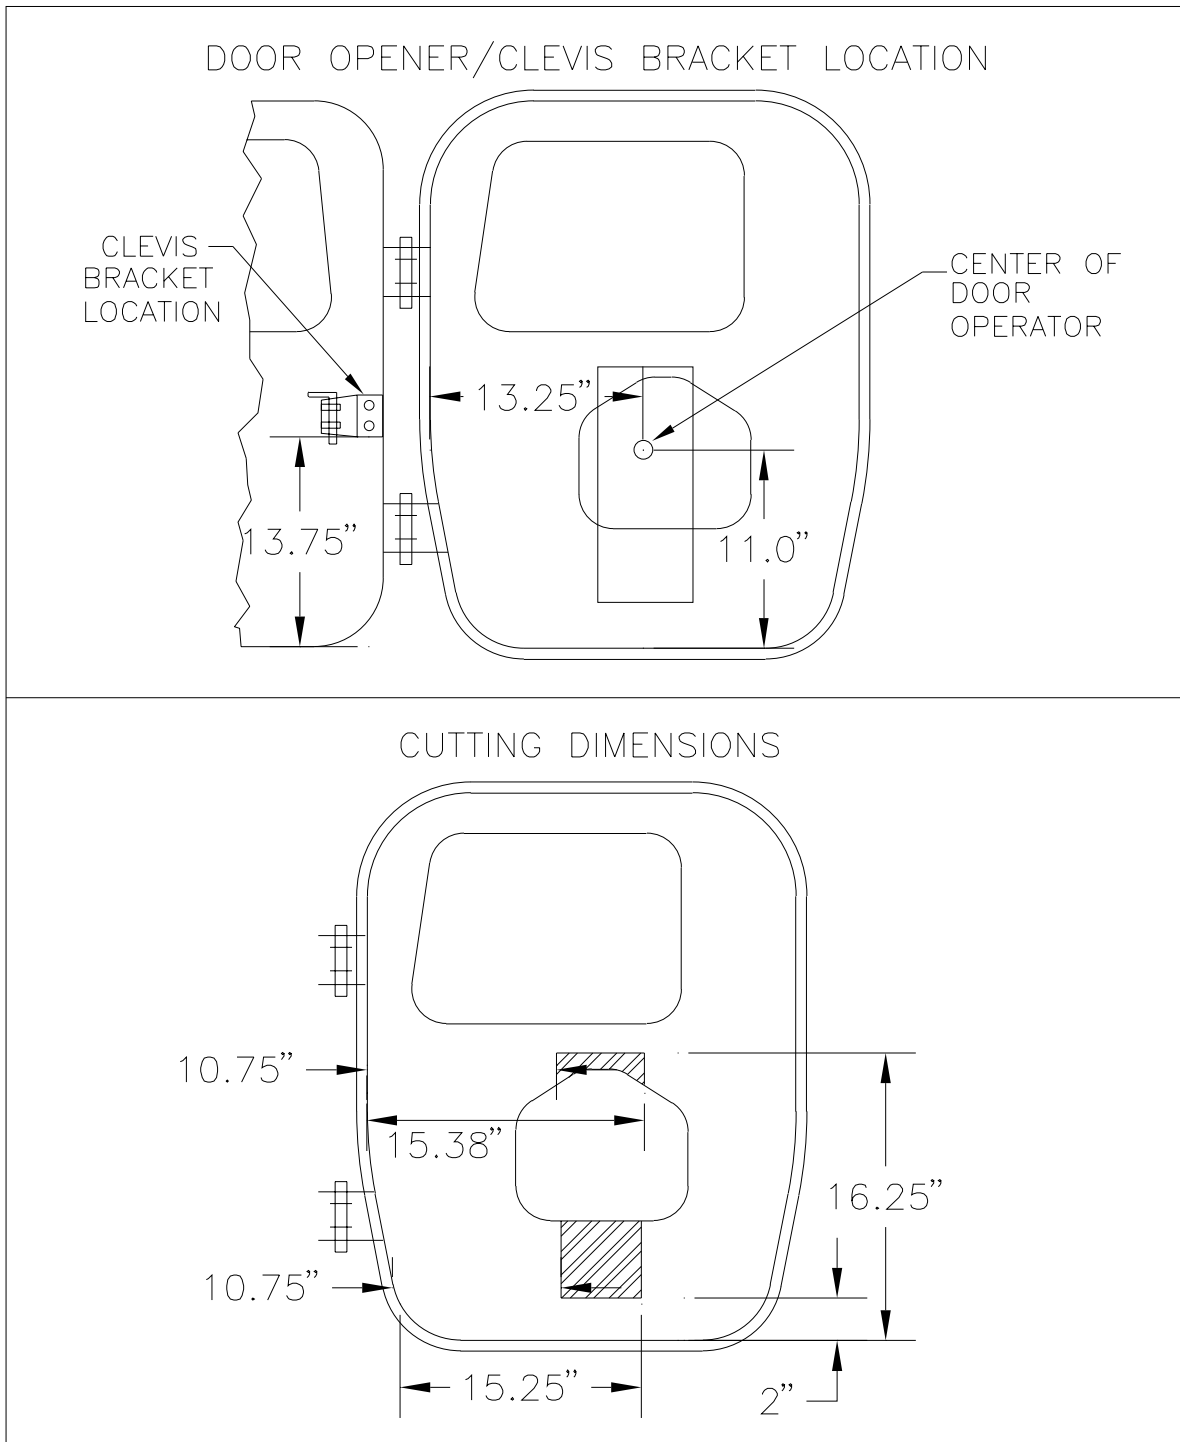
DIMENSIONS FOR CUTTING AND MOUNTING CLEVIS BRACKET IN REAR RIGHT DOOR
